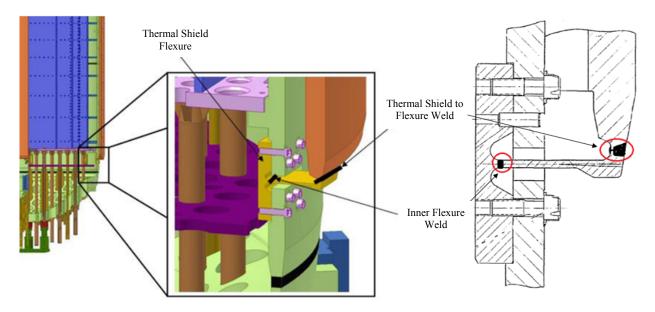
Example Thermal Shield Flexure (in Yellow) Showing Weld Locations
